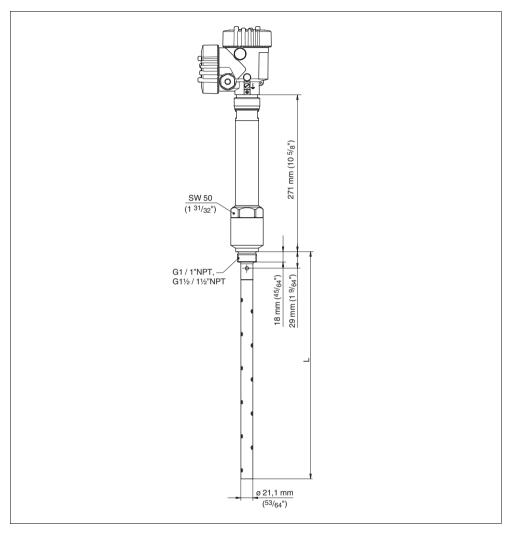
VEGAFLEX 67, coax version with thread (-110 ... +400 °C/-166 ... +752 °F) L Sensor length, see "Technical data"
